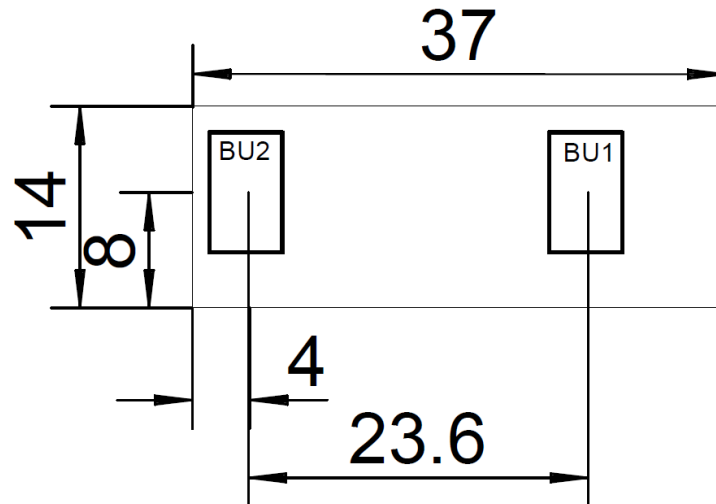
SMARTsat® OEM II Board Physical Dimensions, Bottom View (in mm)
